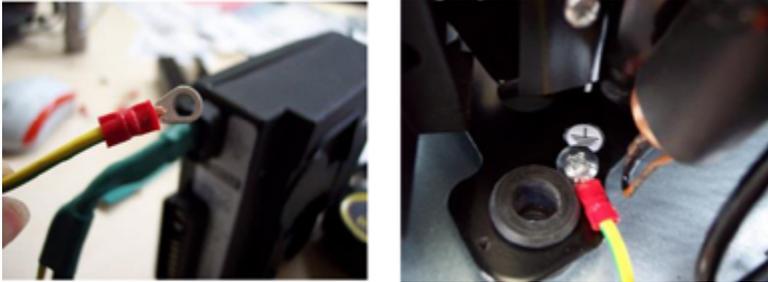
Detail of earthing cable connection on the metal part of the compressor
